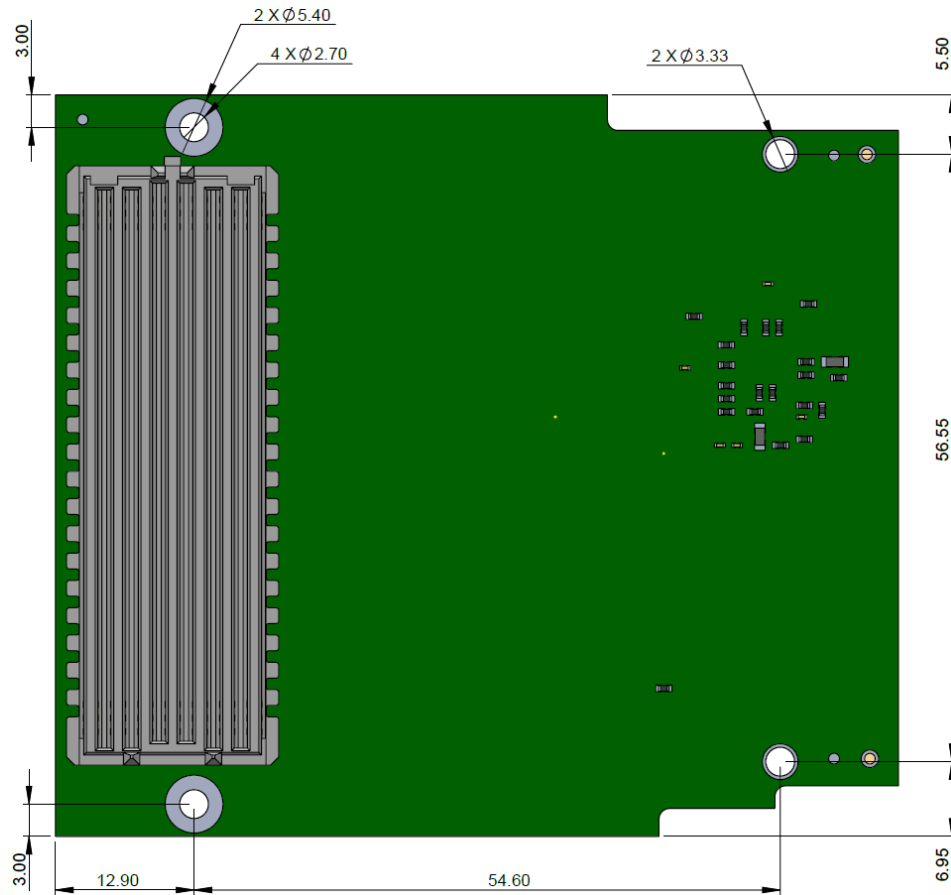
FMC/FMC+ Loopback Test Module Mechanical dimension – Bottom View
